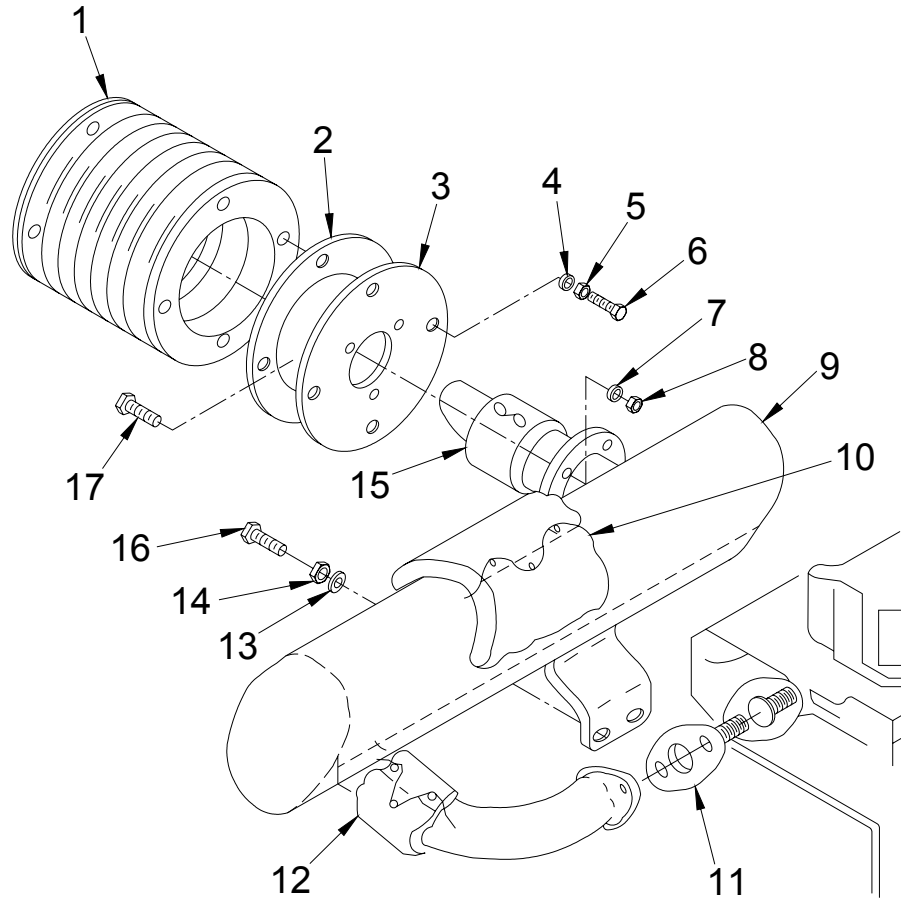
EXHAUST SYSTEM ASSEMBLY/MUFFLER ASSEMBLY
